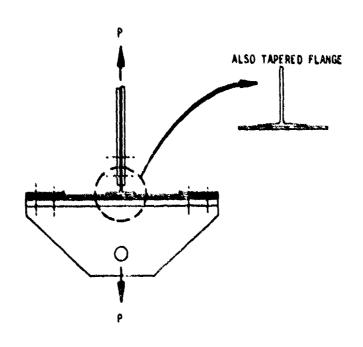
FRAME BENDING TEST (SPECIMEN 23) AND RESUILTS
